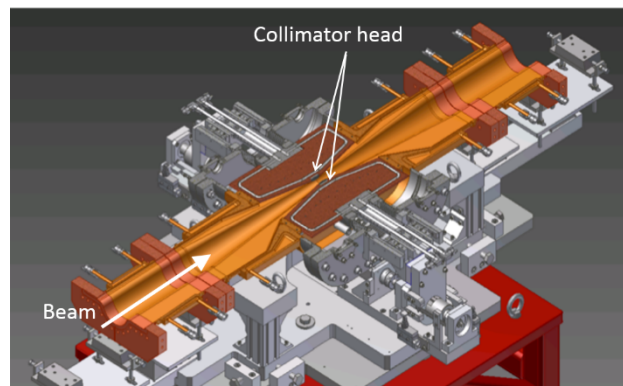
Conceptual structure of new beam collimator (horizontal type).
